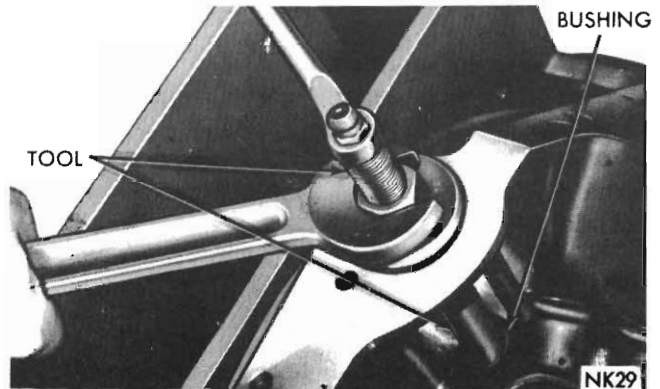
Burnishing distributor drive shaft bushing (Using Tool E9C65H)
